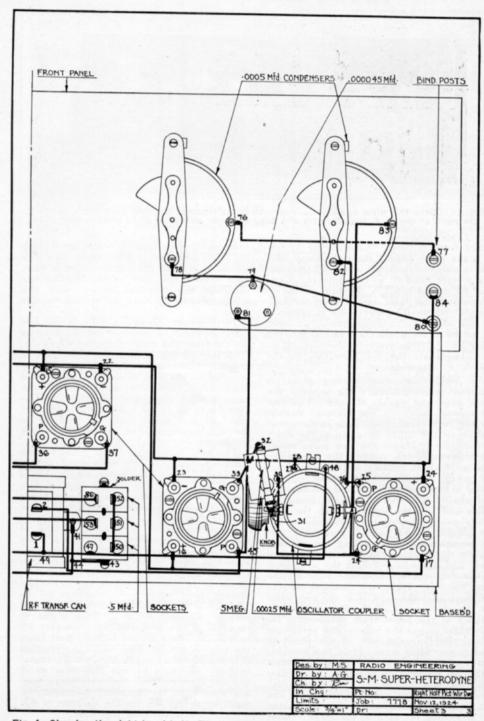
Showing the right hand half. The base panel is tipped down to simplify the drawing
